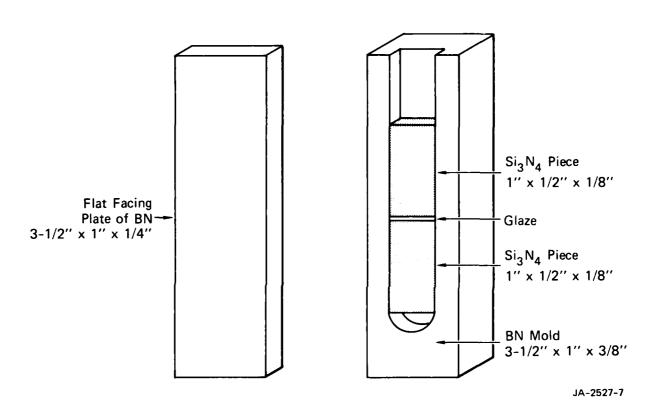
BORON NITRIDE JIG USED IN JOINING TWO PIECES OF ${\rm Si}_3{\rm N}_4$ The upper piece is glazed before being joined to the lower piece.
